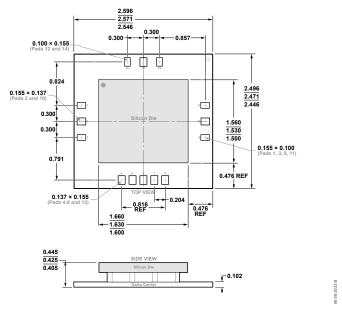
14-Pad Die on Carrier [CHIP], (C-14-8), Dimensions shown in millimeters
